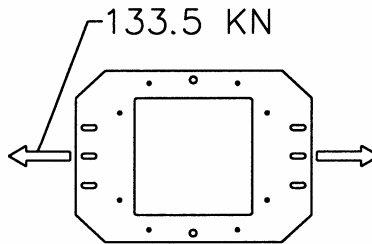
Tensile load test guy plate No. 1, No. 2, and No. 3
